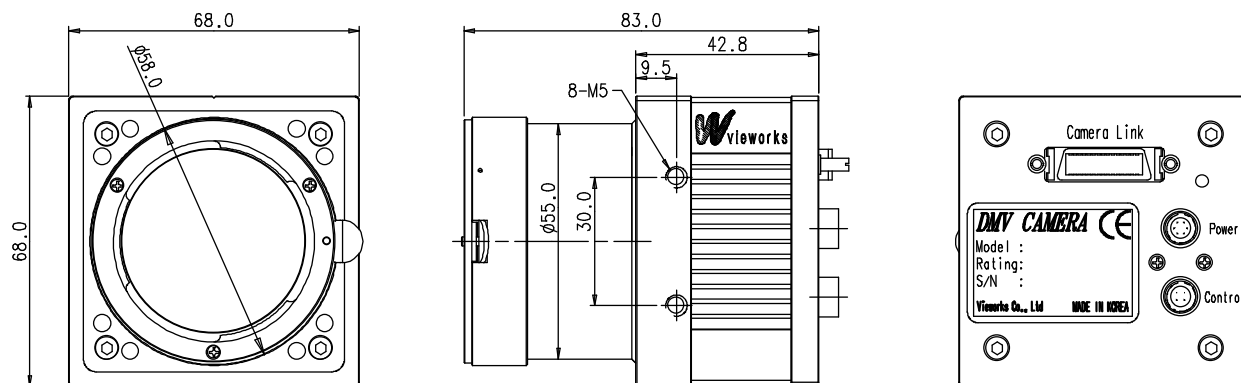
VH-5MC Mechanical Dimension (F-Mount)
